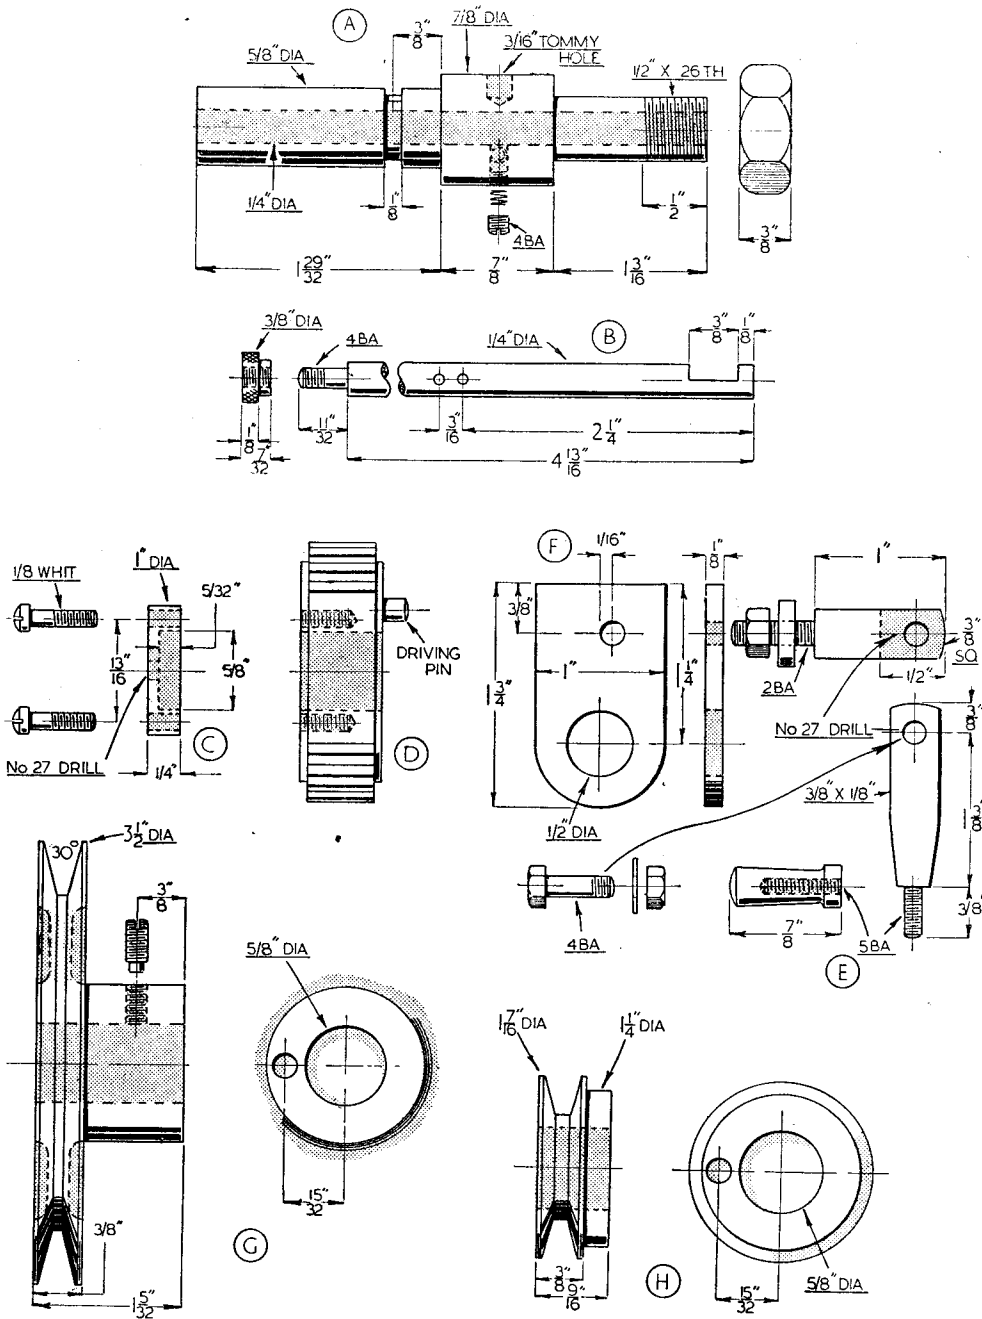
"A," the body; "B," the actuating-rod; "C," the collar for the gear wheel, "D"; "E," the control lever and bracket; "F," the clamp plate; "G," the spindle belt pulley; "H," the mandrel belt pulley
